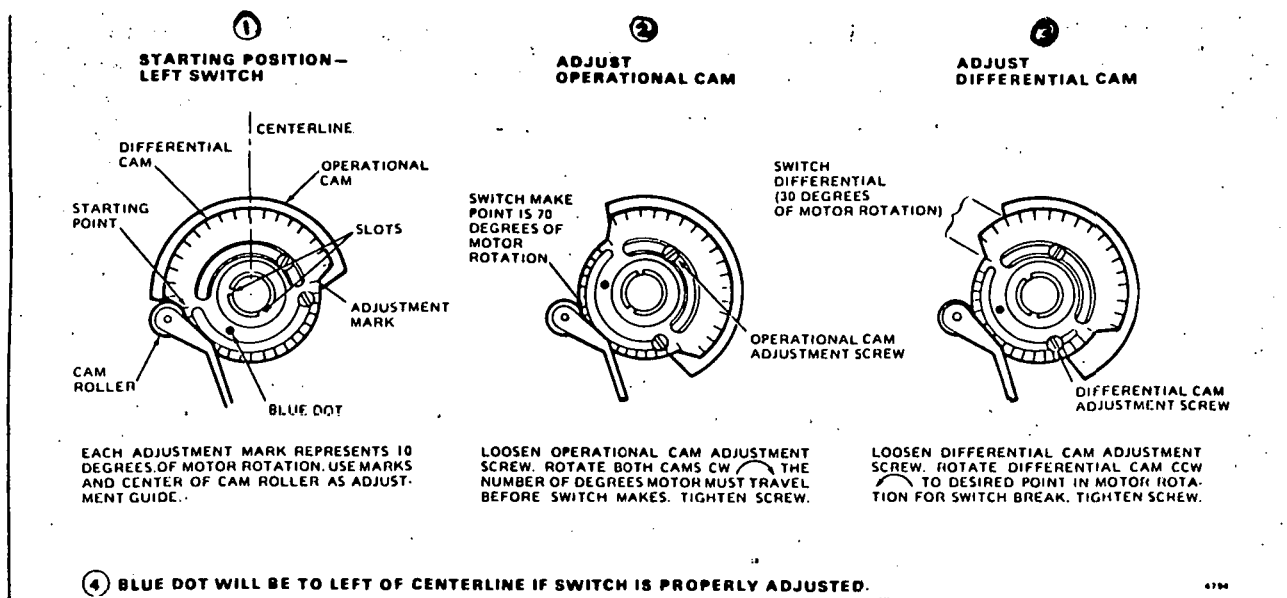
ADJUST MAKE AND BREAK POINTS OF LEFT AUXILIARY SWITCH.
